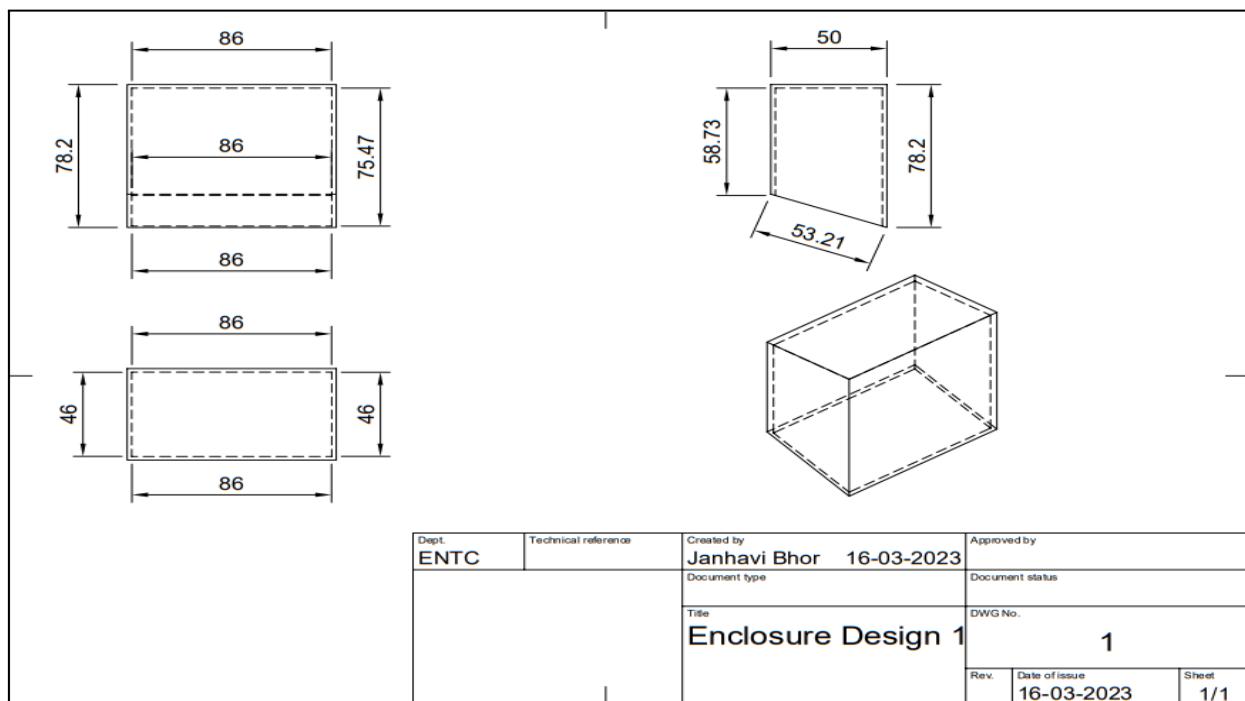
Sketch Constraint of Enclosure design 1 for controller on fusion 360
